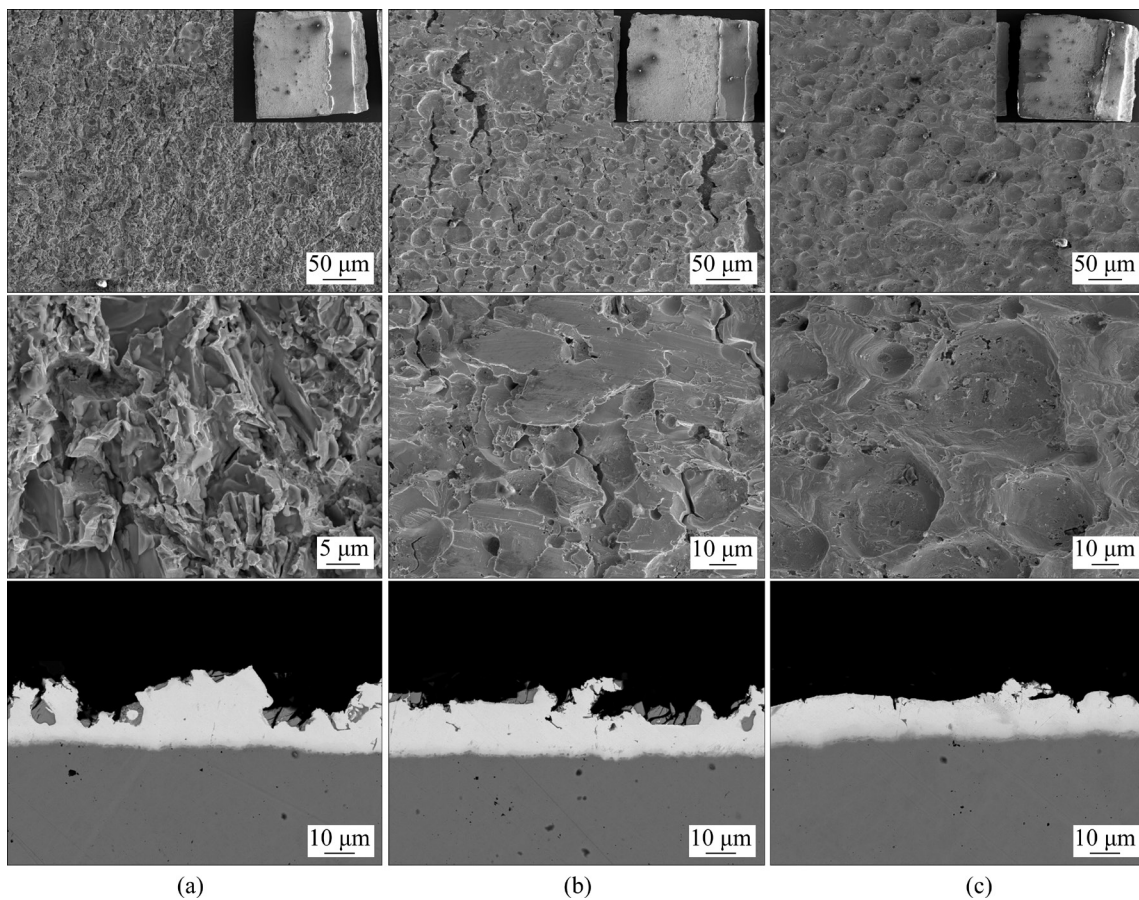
Fracture morphologies of Au–Ge/Cu joints after soldering for 5 min (a), 20 min (b), and 60 min (c)
